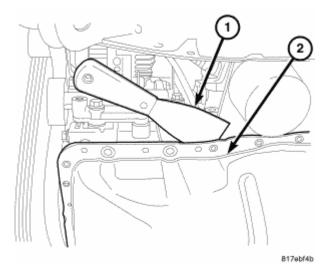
Oil Pan Removal Courtesy of CHRYSLER LLC
